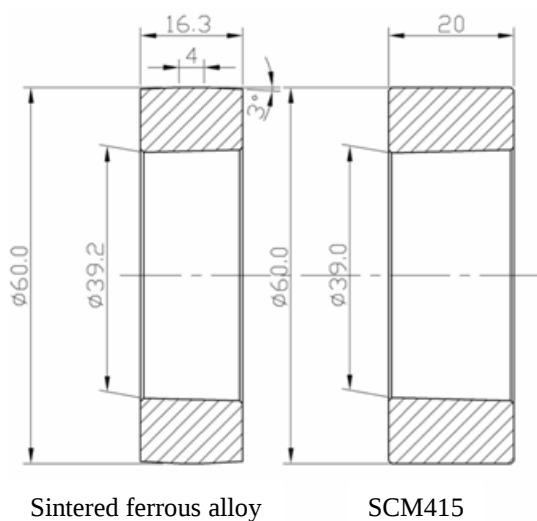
Drawing of sintered ferrous alloy roller and SCM415 roller for contact fatigue test.
